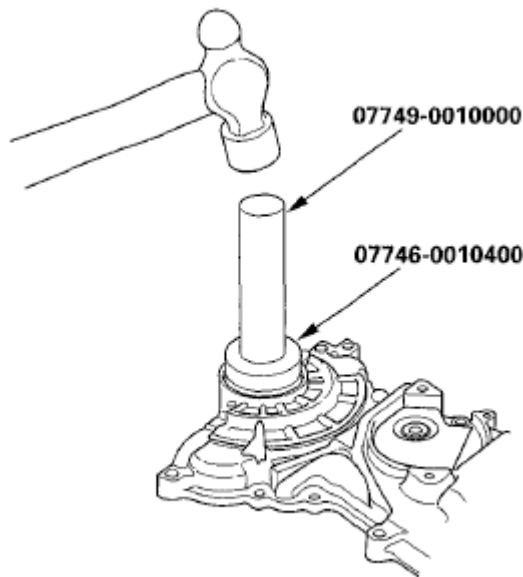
Driving Oil Seal Squarely Into Chain Case Using Driver Handle & Bearing Driver Attachment
